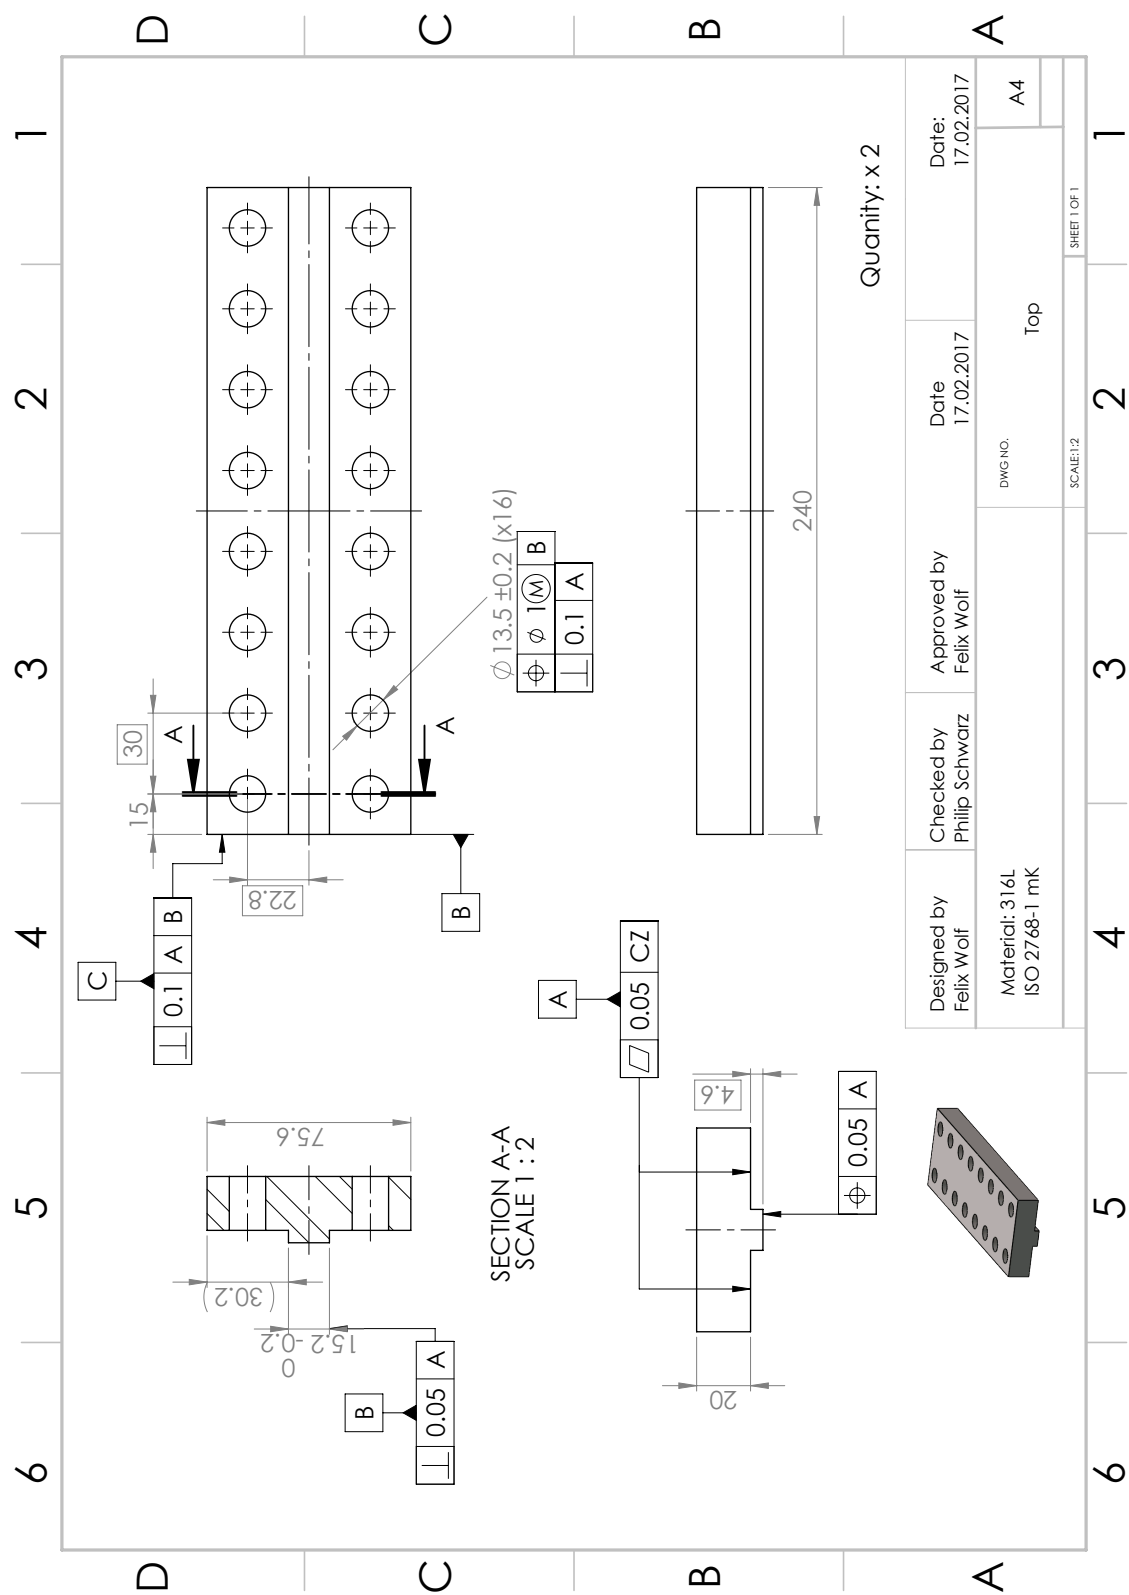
Manufacturing drawing of the heat-treatment mould top part.
